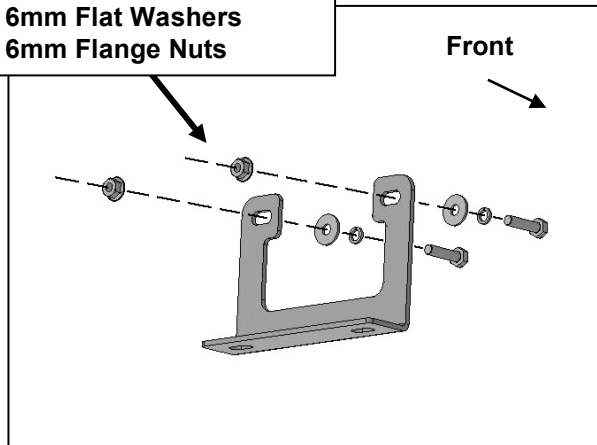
Models equipped with ACC, remove sensor from OE mounting bracket
